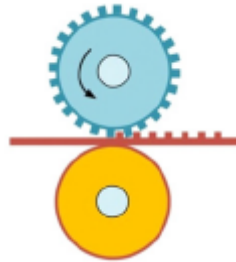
schematic representation of roll-to-roll hot embossing, consist of cylinder mold, smooth roll and a substrate between them
